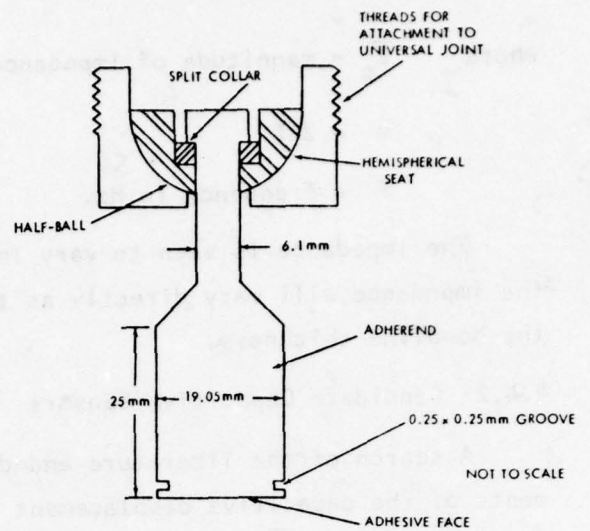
SCHEMATIC CROSS SECTION OF ADHEREND AND GRIPPING ASSEMBLY
